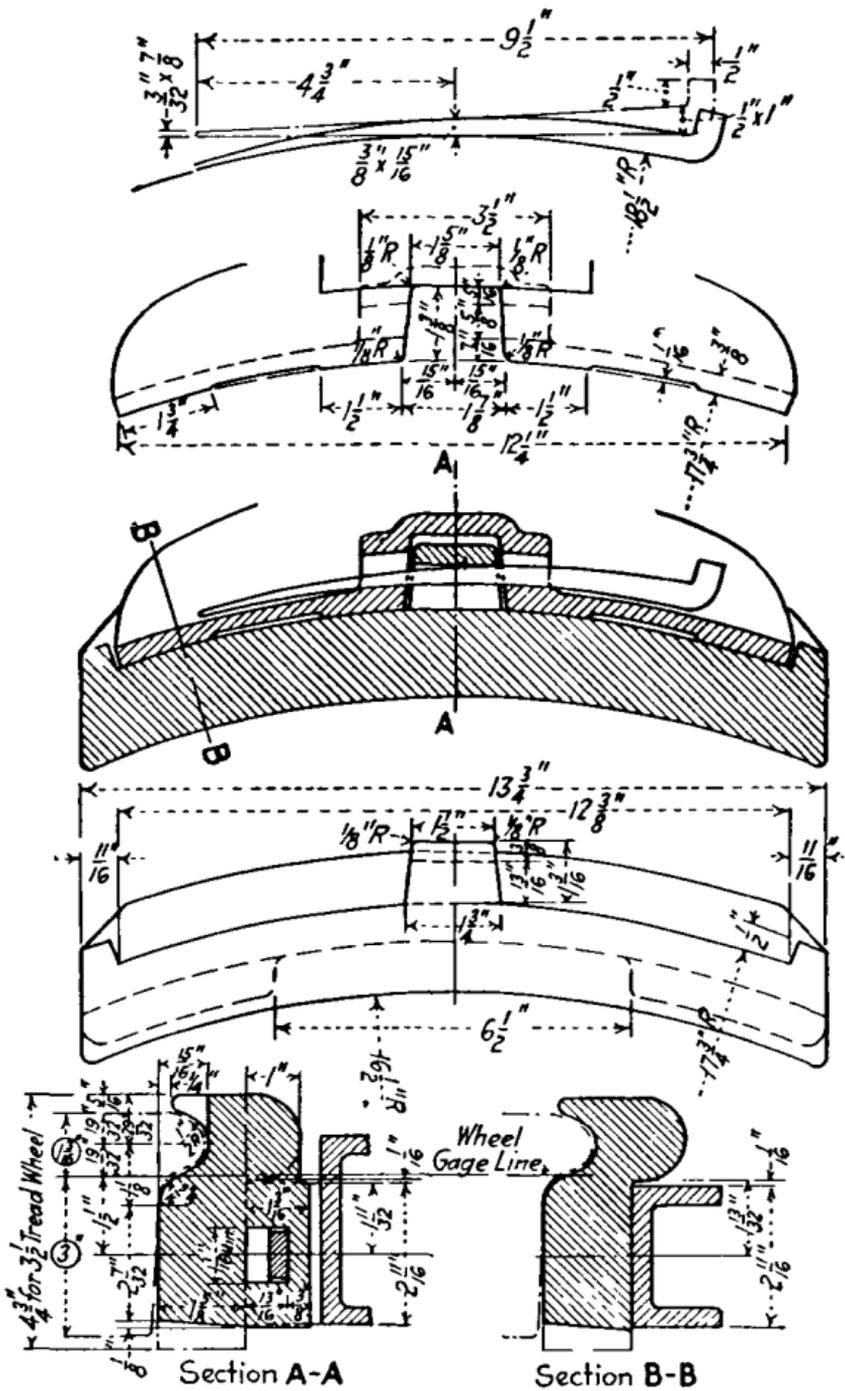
A.E.R.E.A. standard brake head, shoe and key for 3 in. and $3\frac{1}{2}$ in. tread, wheels 33 in. to 36 in. diameter.
